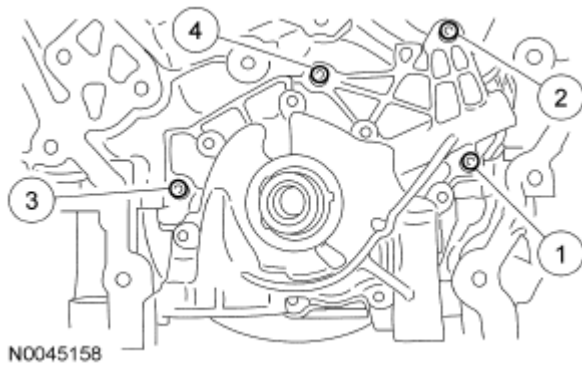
Locating Removal Sequence Of Oil Pump Bolts
